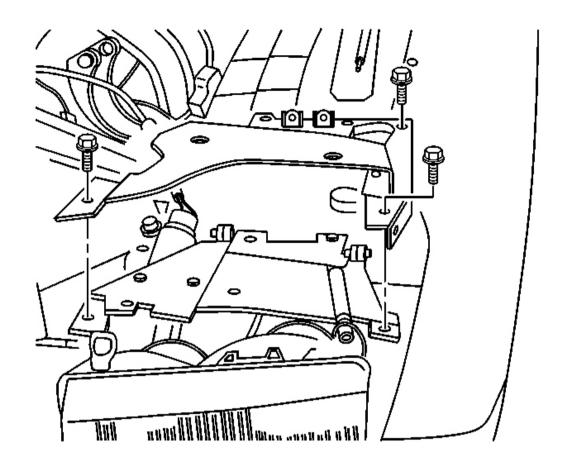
Headlamp Intermediate Bracket To Headlamp Courtesy of GENERAL MOTORS CORP.
